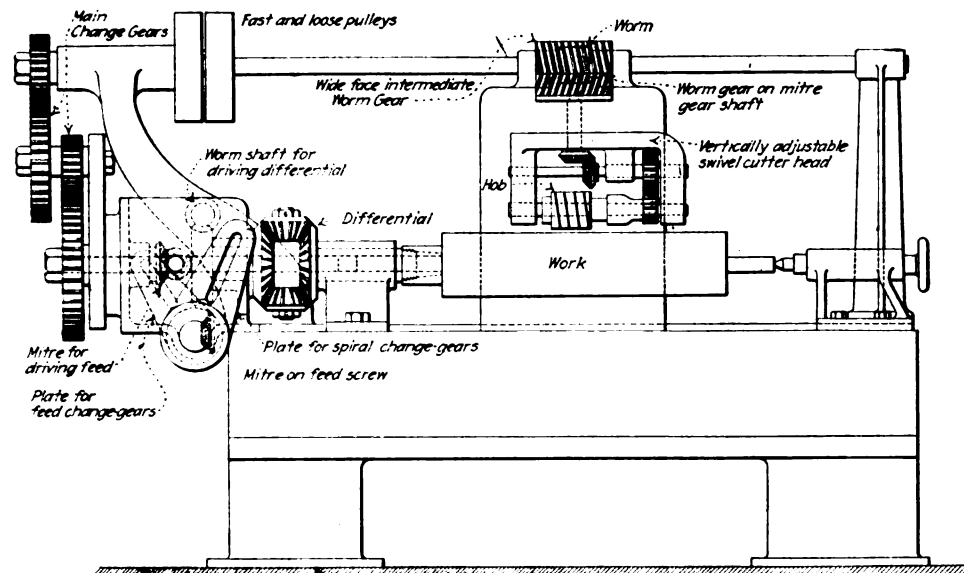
HOBGING MACHINE FOR GROOVING ROLLERS
